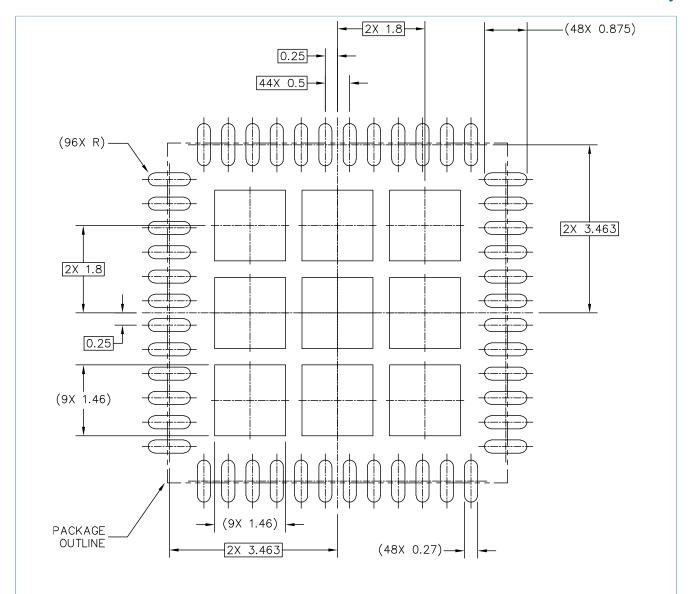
Reflow soldering footprint part1 for HVQFN48 (SOT619-17(D))
